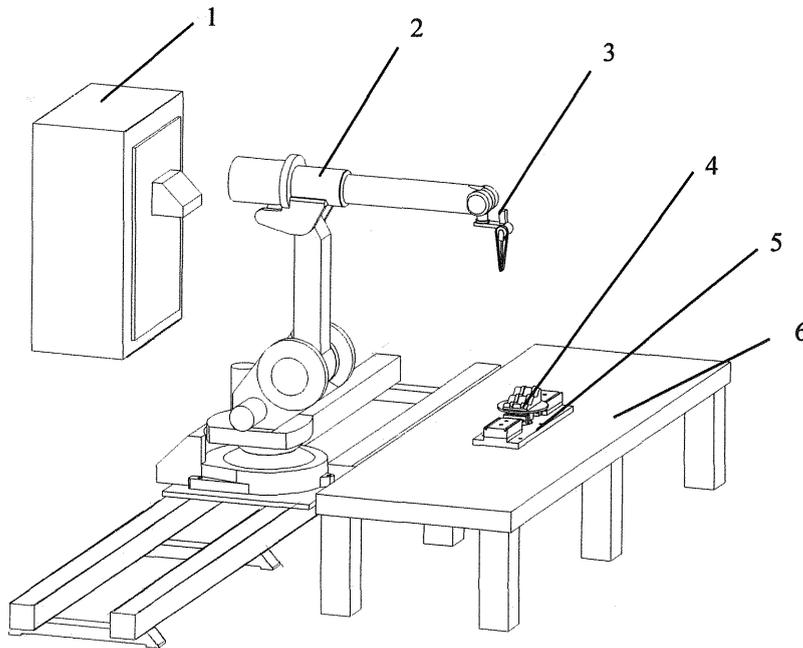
The architecture of the robotic finishing system: 1-controller; 2-articulated manipulator; 3-finishing tool; 4-SLS part; 5-fixture; 6-platform.
